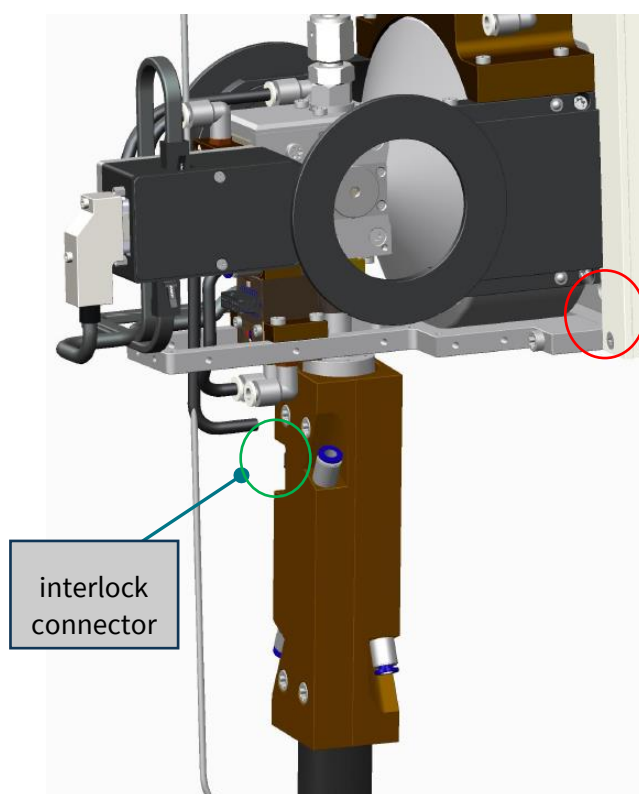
Upper cooling block held in position with four M6-screws around the straight section of the flex-hose assembly.
